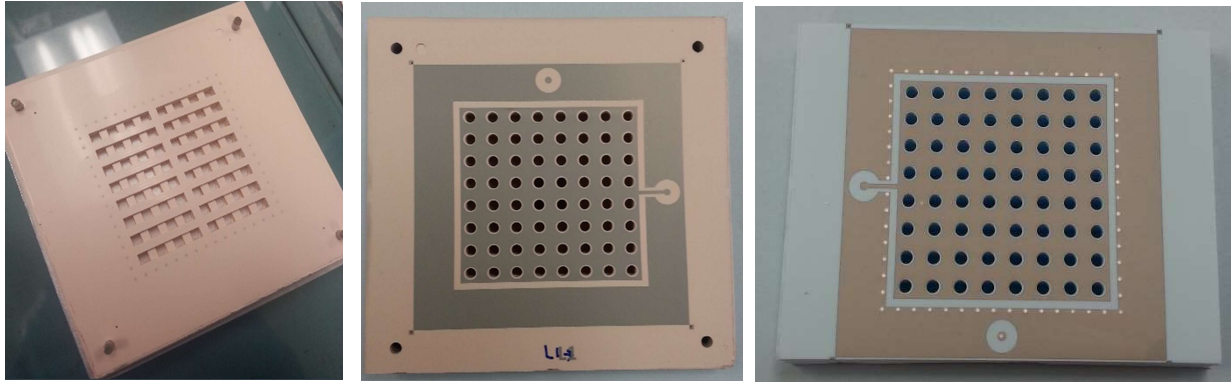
Photographs of the LTCC-ET during fabrication. (Left) Partially completed thruster stack showing internal cavities. (Center) Fully laminated device before co-firing of the ceramic. (Right) Fully complete device after co-firing
